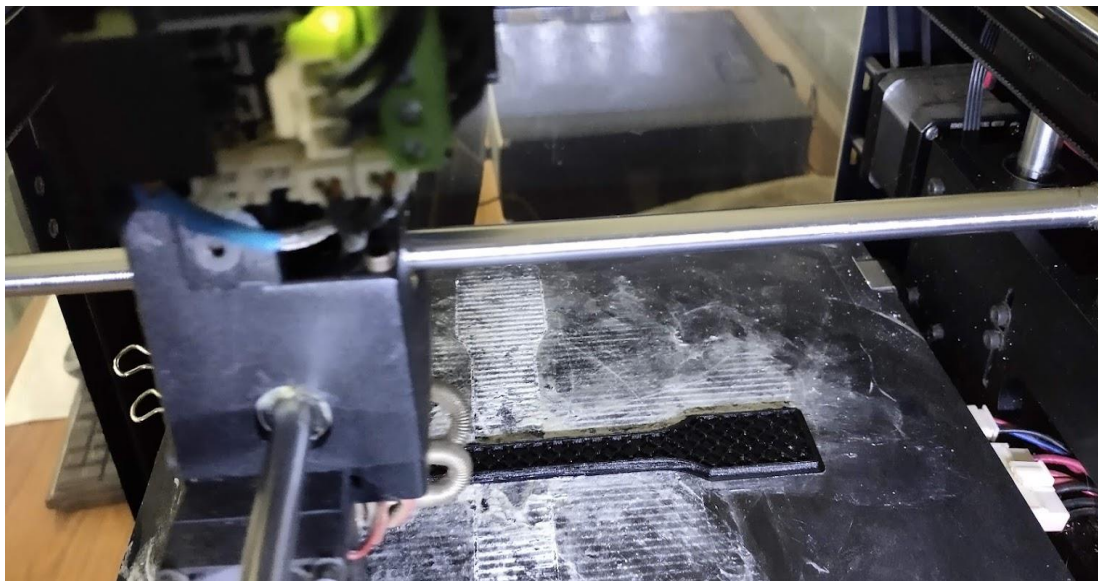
Printing of the nylon specimen using 3D printer in y- axis
